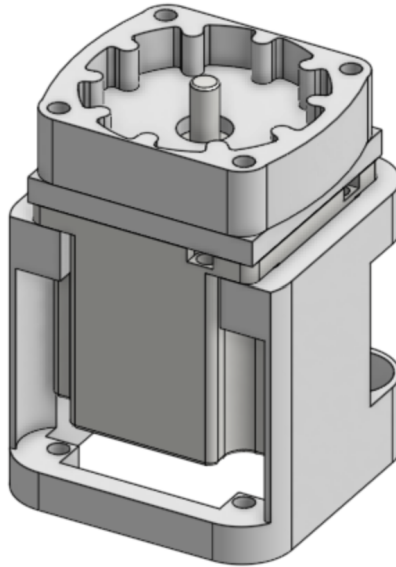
Cycloidal gearbox housing positioned above the mounted carousel motor.
